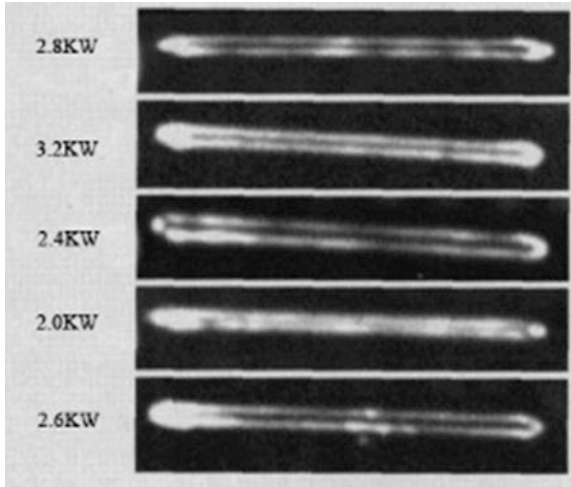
Heat images of welding specimens with different welding power [26]
